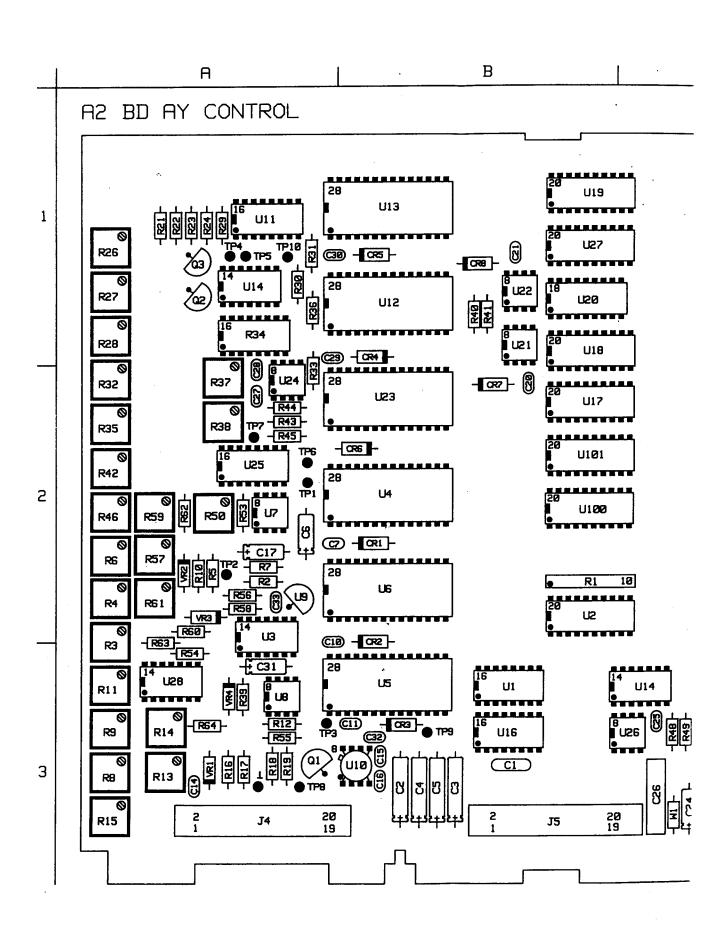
CONTROL BD R2 COMPONENT LAYOUT AND LOCATOR SERVICING THE CONTROL BOARD 10.5-17
